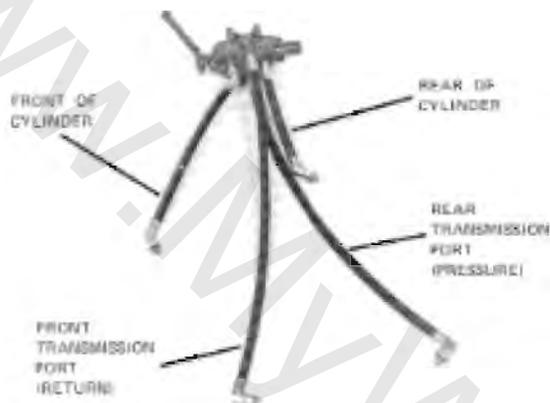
C-Series Hydraulic Valve Hose Connections
